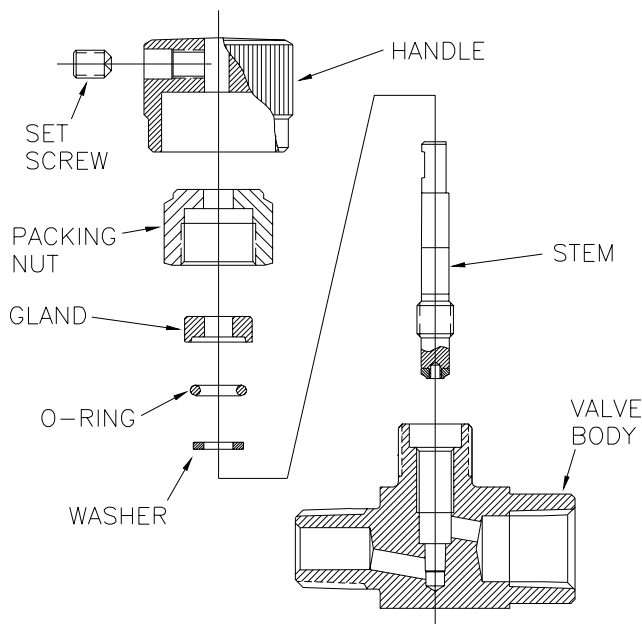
Bar Stock Needle Valve w/O-Ring Packing Exploded View
